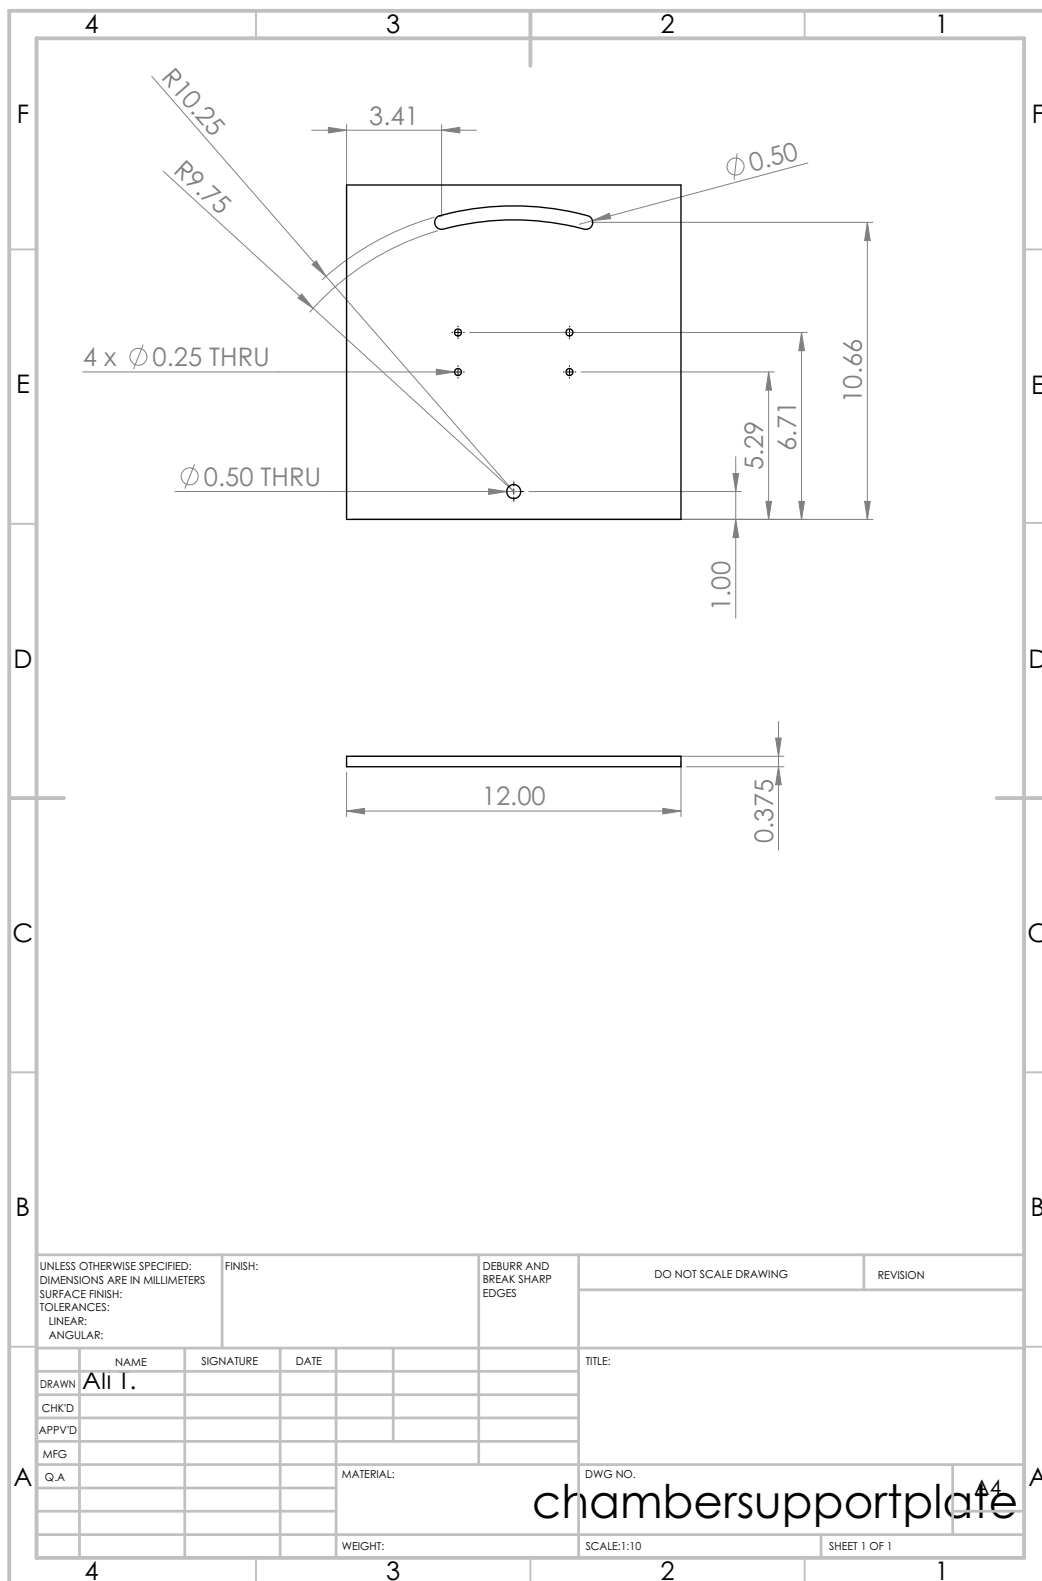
Main chamber support plate to be fixed on the xy positioning table
